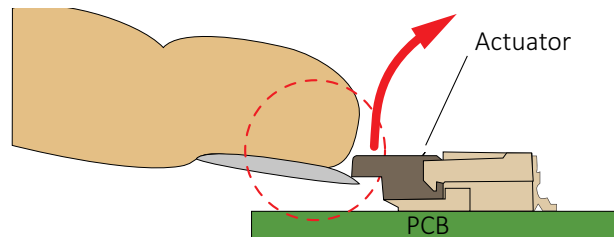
Opening 36-pin FFC flip connectors on adapter boards
